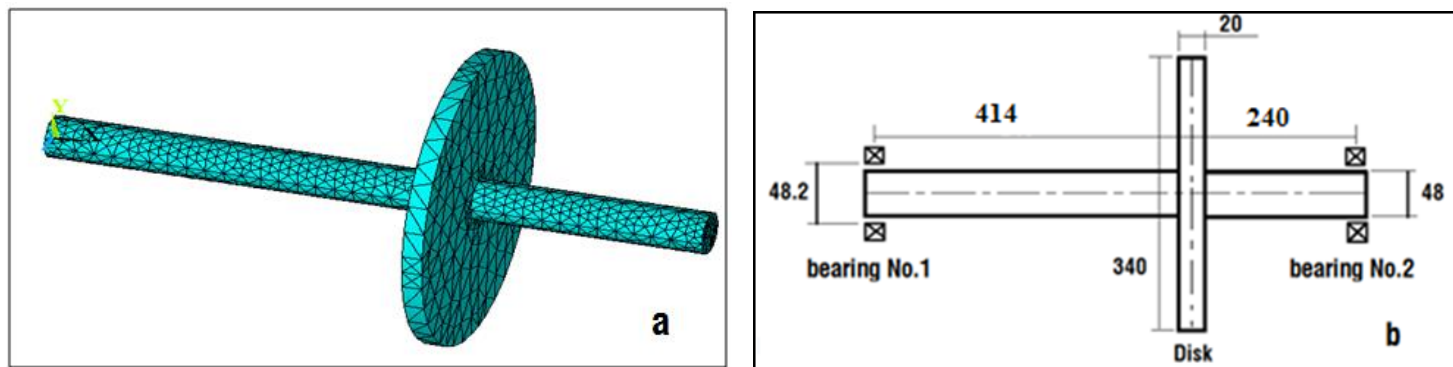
(a) Ansys rotor model (b) Mechanical drawing of present rotor bearing system.
